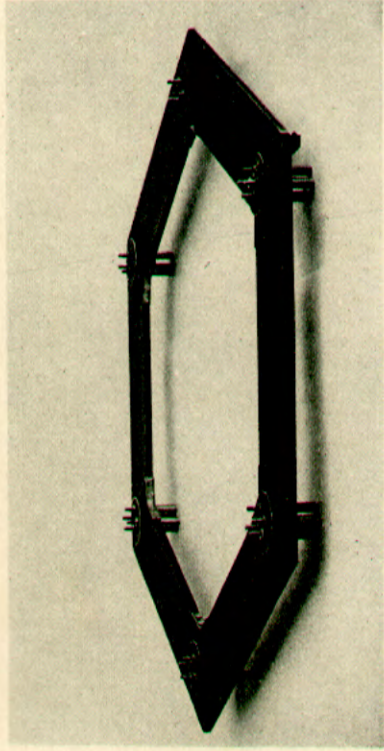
Ebonite valve panel with valve legs assembled to fit in frame
